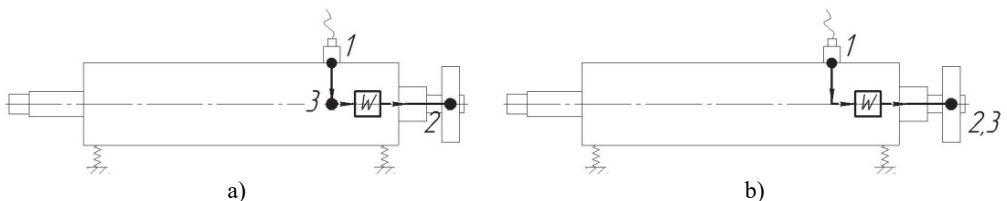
Measurement scheme for the assembling and manufacturing faults estimation of SU on rolling bearings a) and spindle vibrations b): 1 – point of vibration measurement of the spindle housing; 2 – point of vibration calculation of the spindle axis (tool-holder); 3 – point of the unit harmonic force application
